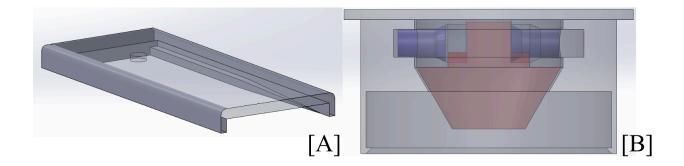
Final CAD design for slider (A) and cap (B) featuring magnet capsules, the flared ends, and corresponding countersunk holes and rails to guide the capsules between "locked" and "unlocked" state.
